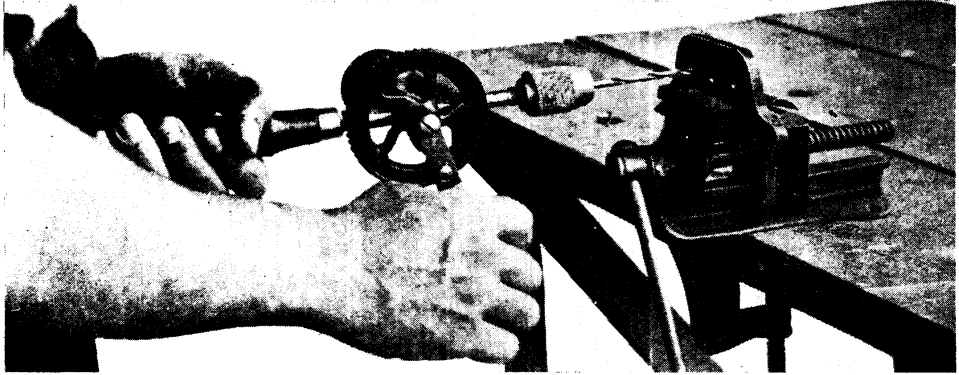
Holes are being drilled for the control handles. A hand drill is used for this purpose, and the work is held in a vice and protected with leather
